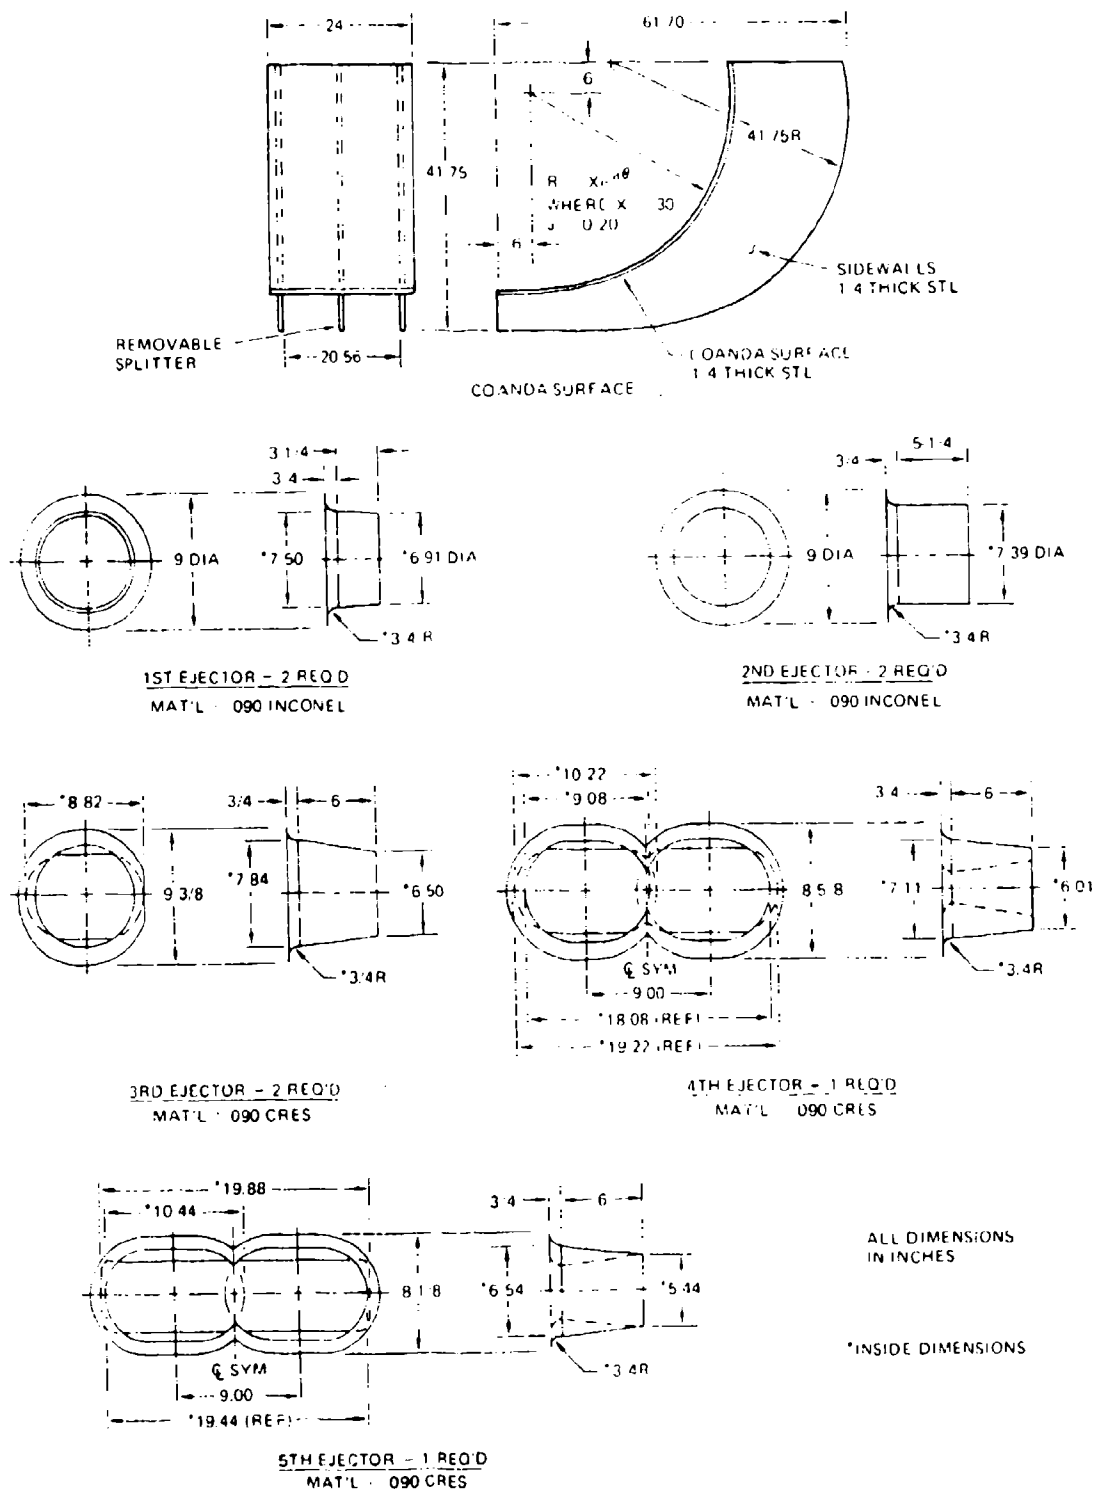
Dimensional drawings of Coanda surface and ejectors for twin engine misalignment test.
